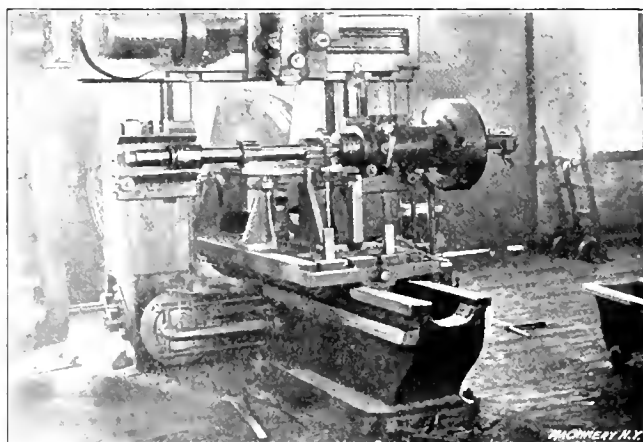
Surfacing the Bottom and One Edge of the Bad
